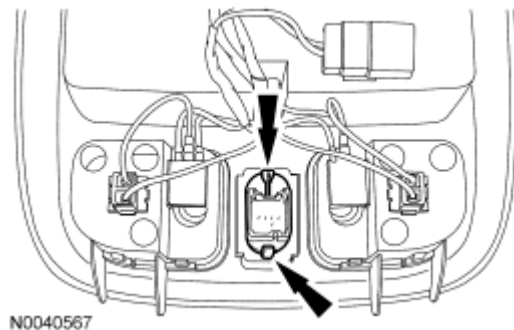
Locating Overhead Console Electrical Connectors Pin And Switch
